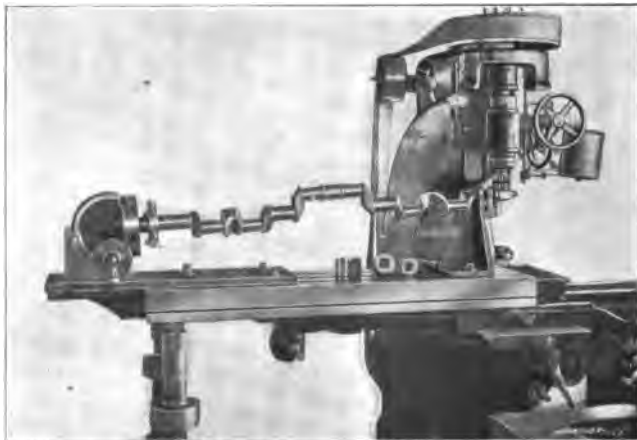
A Vertical Milling Machine set up for Milling the Tapered Square Drive on the Crank-shaft
